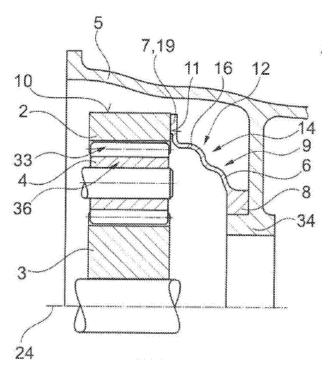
illustrates a planetary gearing with a ring gear (2) connected to casing (5) via an elastically deformable wave element (16). The latter allowing limited movement of ring gear (2) relative to casing (5).
